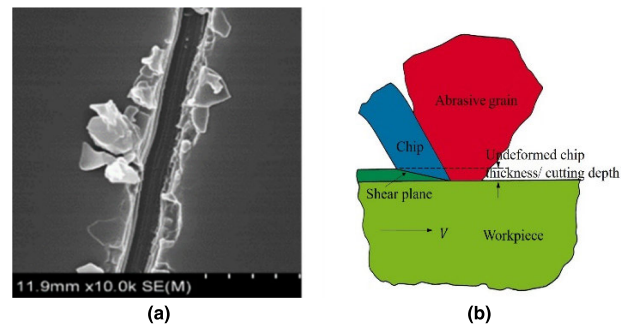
Brittle fracture (cracks) on the IZO-coated Pyrex glass and a ductile fracture (chip making) by an abrasive particle. (a) Brittle fracture (cracks) on the IZO-coated Pyrex glass after AFM nano machining (tip nose radius = 100nm), (b) Schematic of ductile mode cutting by an abrasive particle (applicable to Pyrex glasses).
